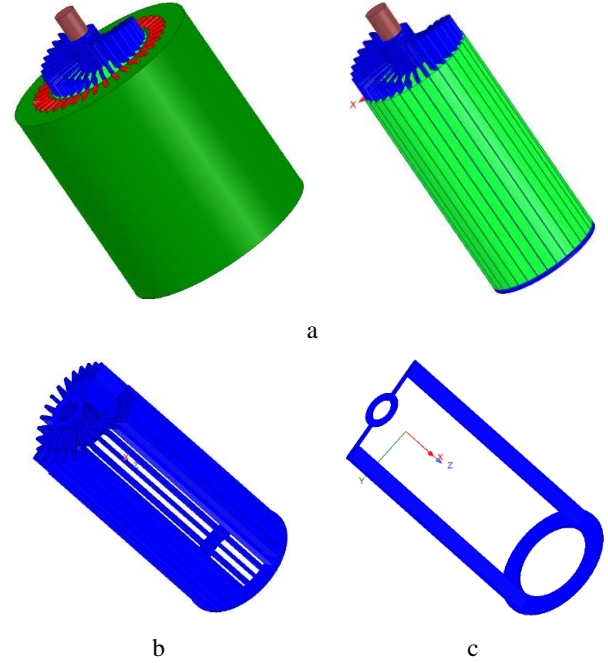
Proposed BLIM, a) the motor and rotor, b) multi cage, c) one cage structure.
